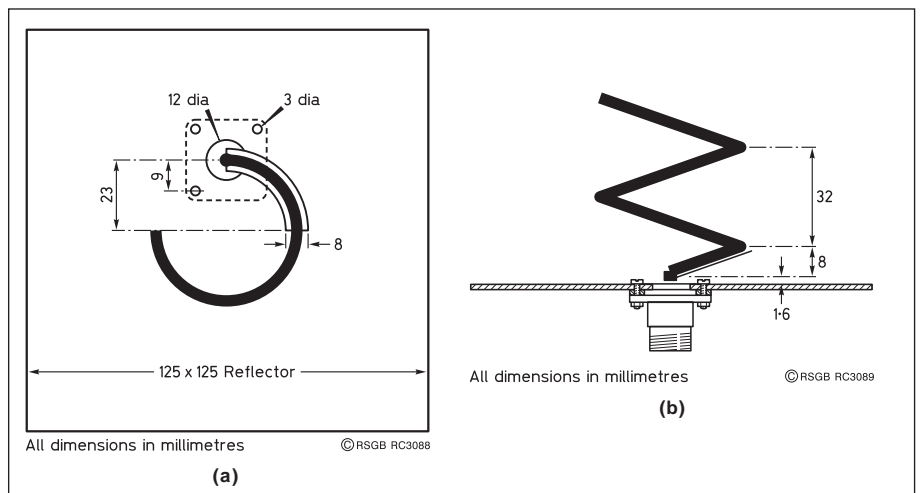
(a) Plan, and (b) elevation views of the helix feed.
